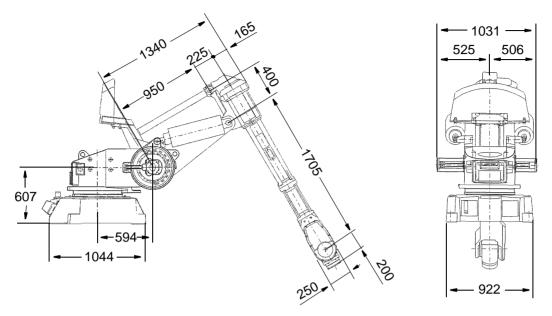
View of the manipulator from the side and rear (dimensions in mm). The robot is shown in its calibration position.
